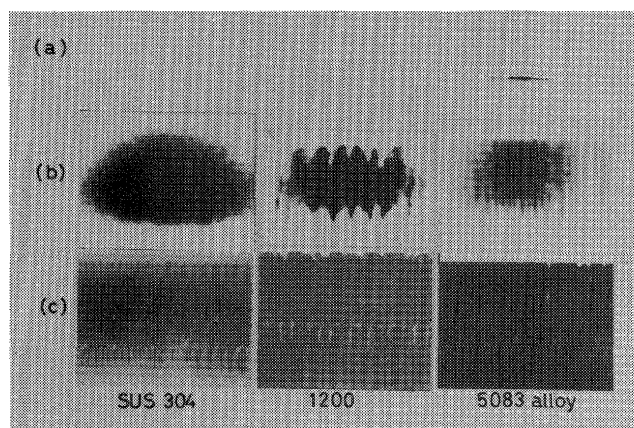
X-ray film photographed from side and back side of weld bead by pin-hole camera and radiography.
